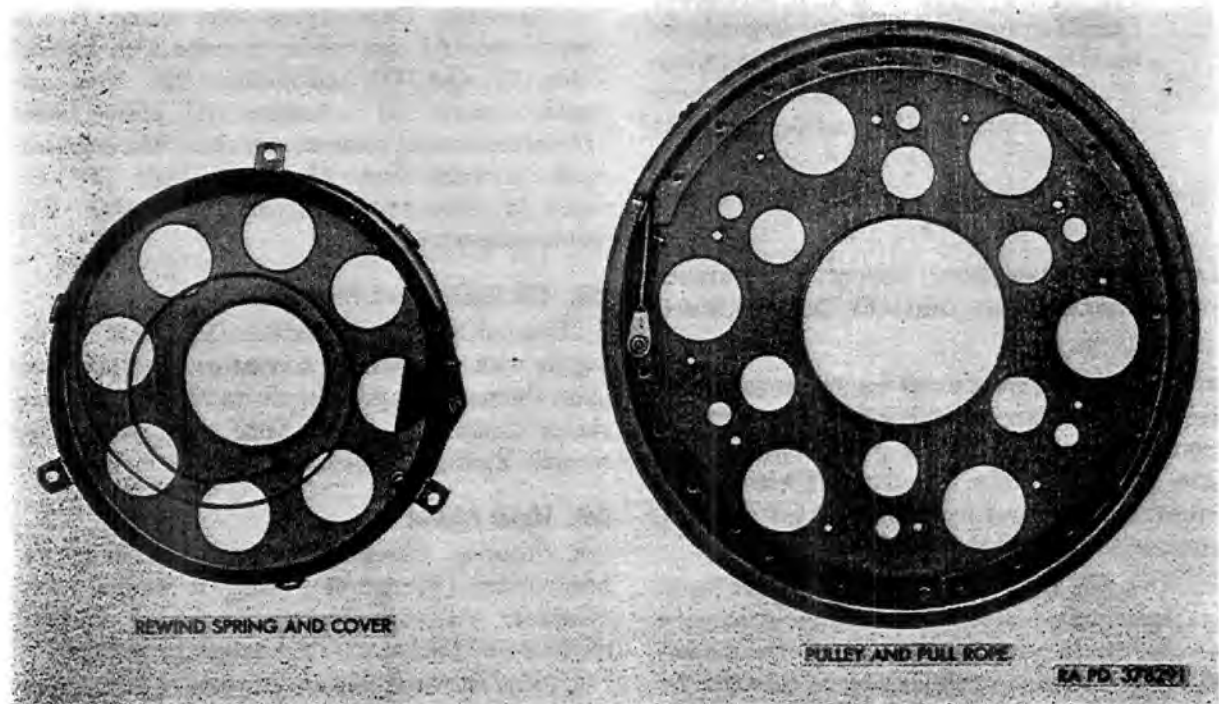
Starter rewind spring and pulley as removed and installed on engine.
